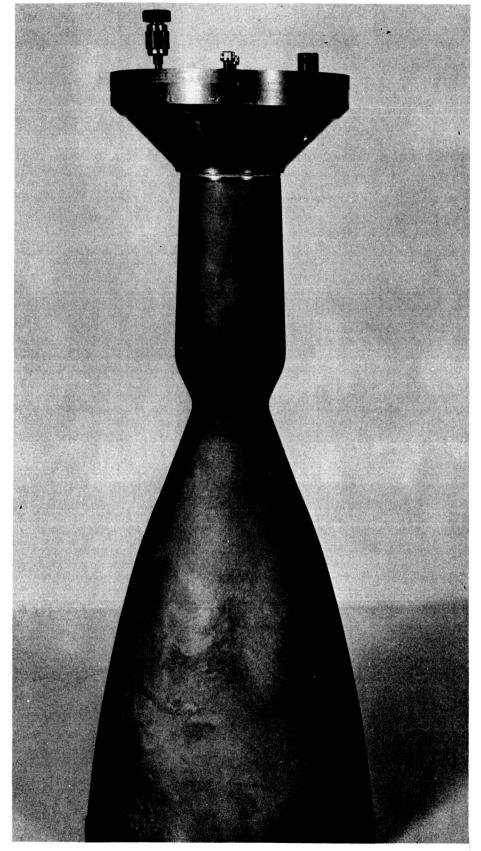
100-lb Thrust Chamber Assembly After Welding Injector and Support to Chamber
